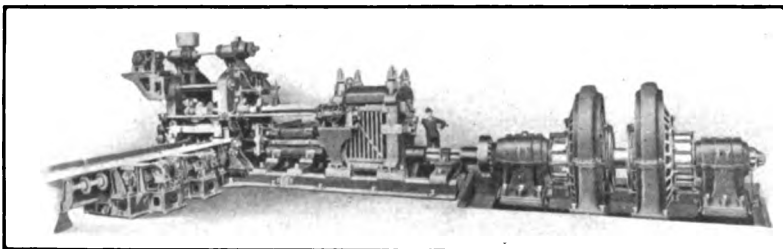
Universal plate mill at the Illinois Steel Company's plant, showing the motor drive
